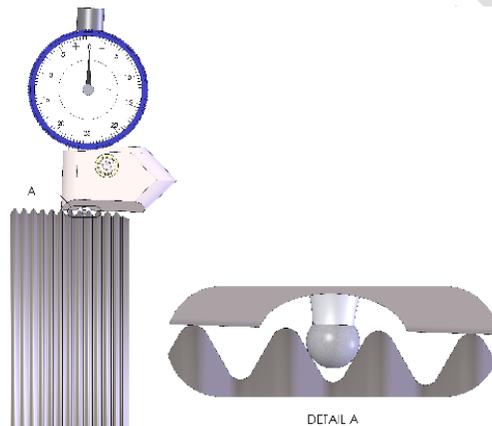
Addendum Gauge (Balanced-type) Applied to Setting Standard—Vee block
